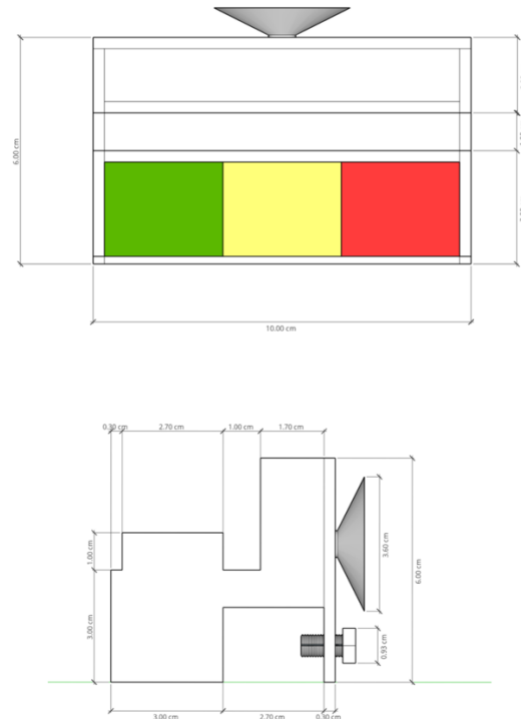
CAD model of the second and final iteration of the support piece. Top: top view. Bottom: side view.
